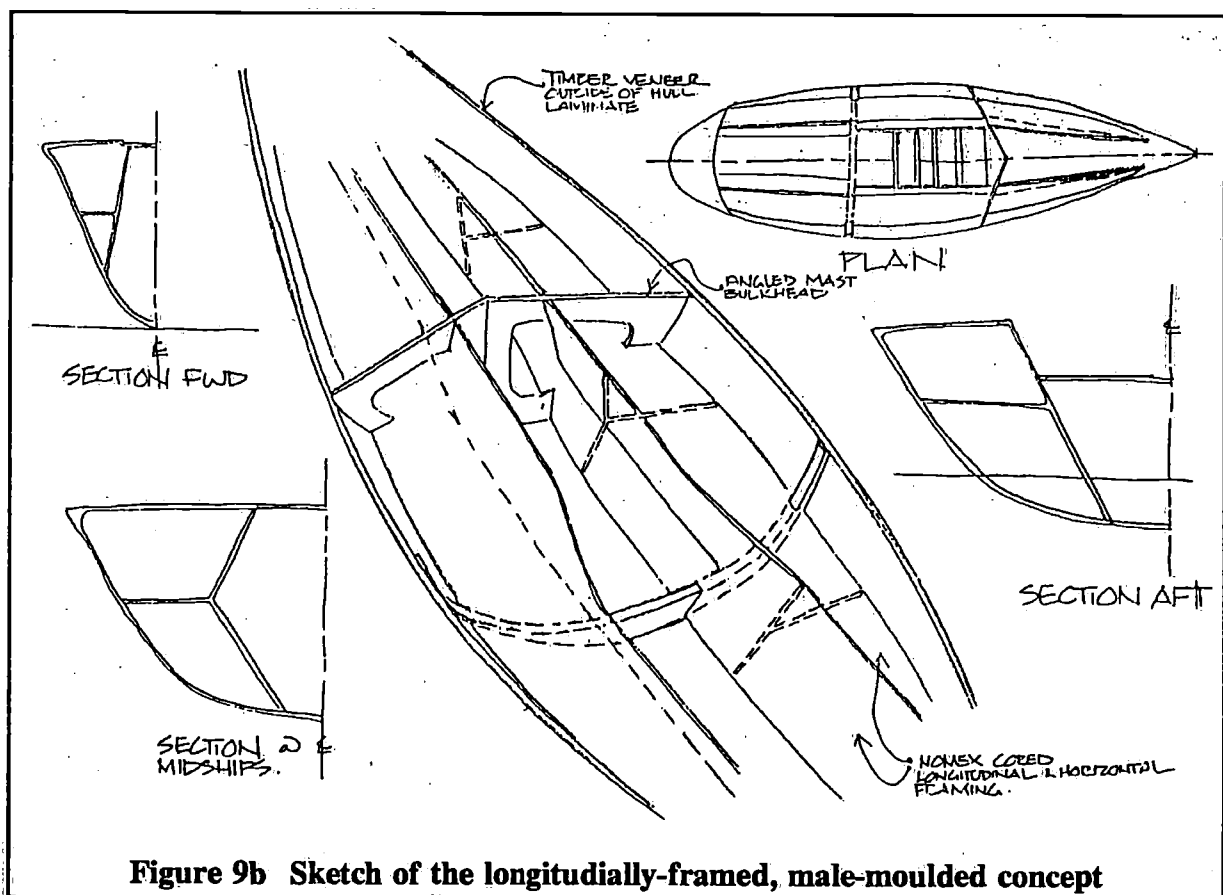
Sketch of the longitudinally-framed, male-moulded concept
